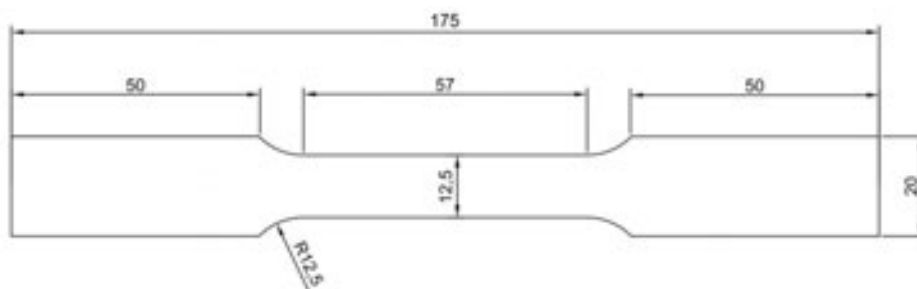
Tensile specimen dimensions prepared according to ASTM E8M-15.
